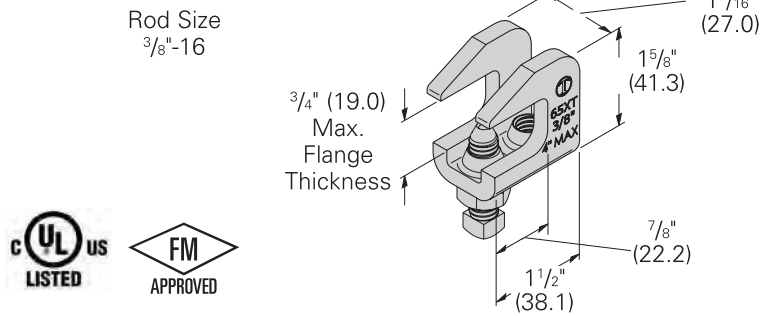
Reversible Steel C-Type Beam Clamp - 3/4" (19.0mm) Throat Opening
